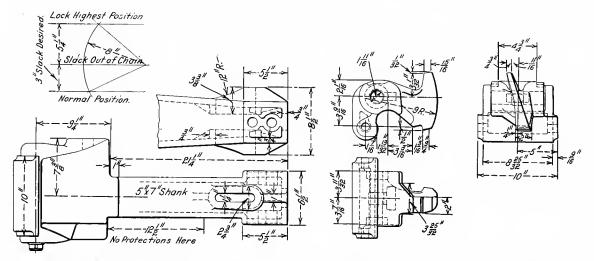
Major Top Operated Freight Coupler and Knuckle. Buckeye Steel Castings Company.
